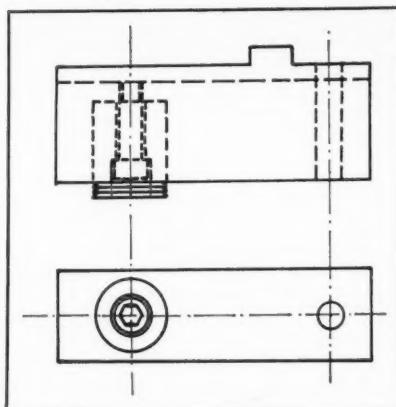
Sketch of standard soft chuck jaw with hardened jaw insert
